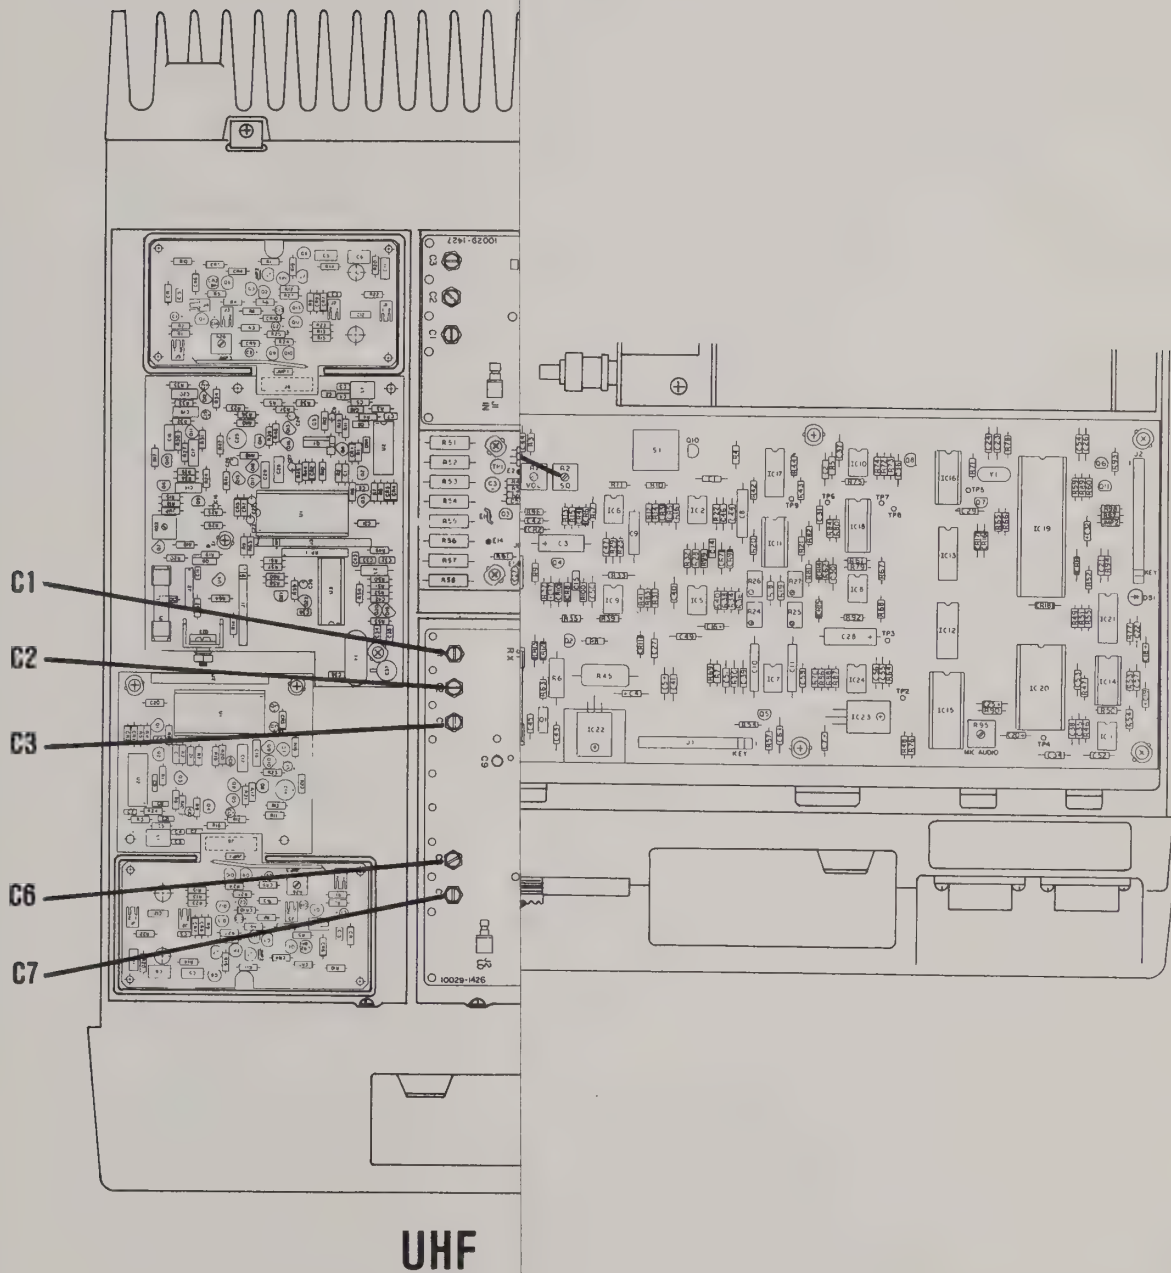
Receiver Front End Module Alignment, Adjustment, and Test Point Locations
